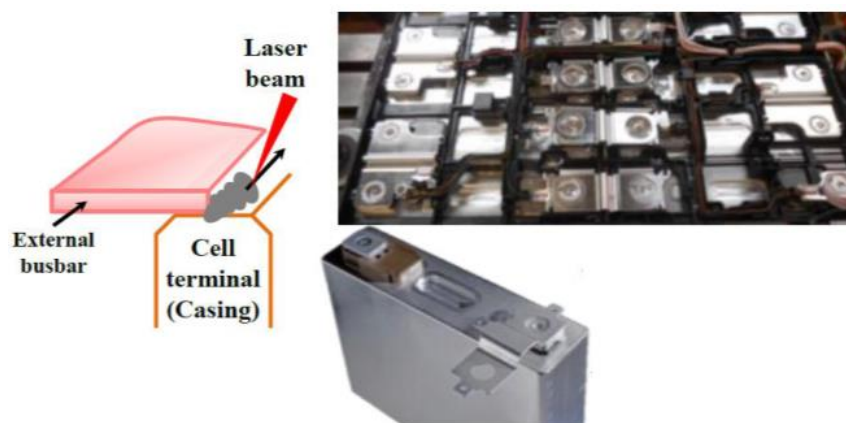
Laser welding for prismatic cell-to-bus bar connections
